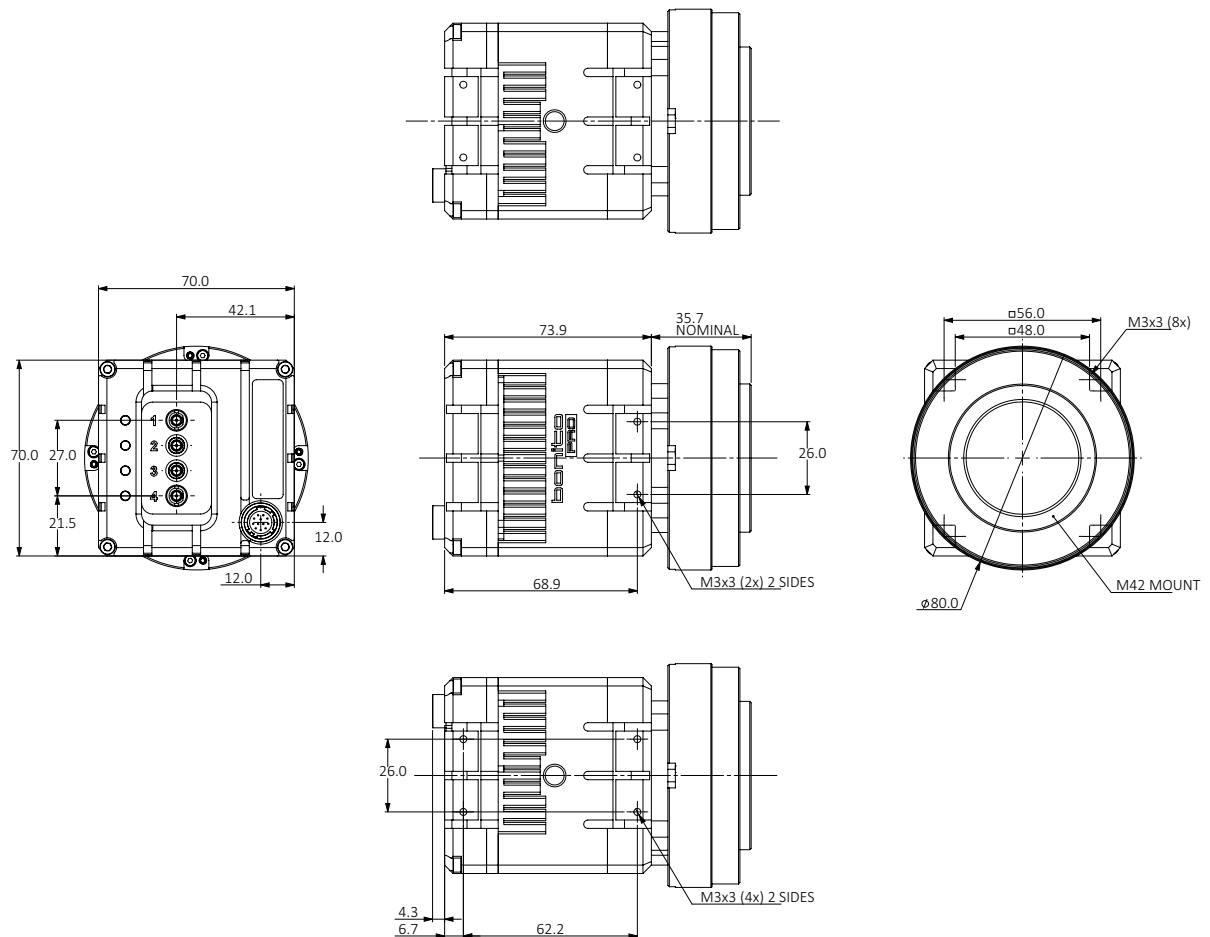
Bonito PRO camera with M42-Mount PA mechanical dimensions
